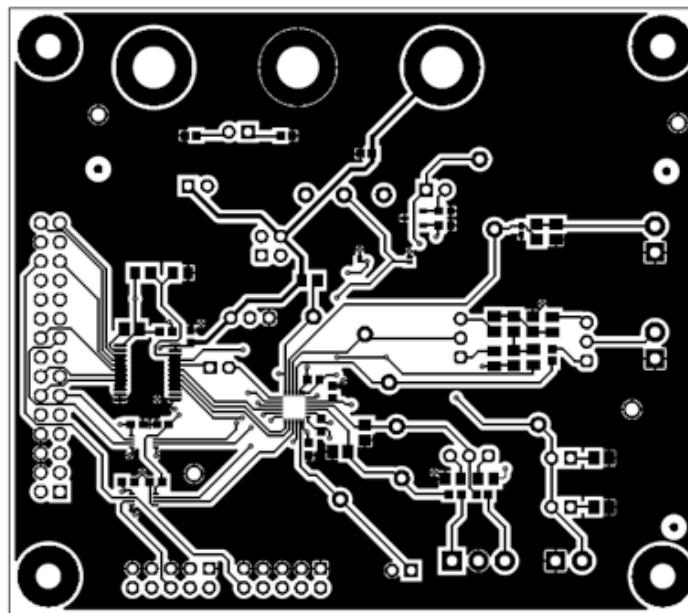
AFE881H1EVM PCB Top Layer Layout
